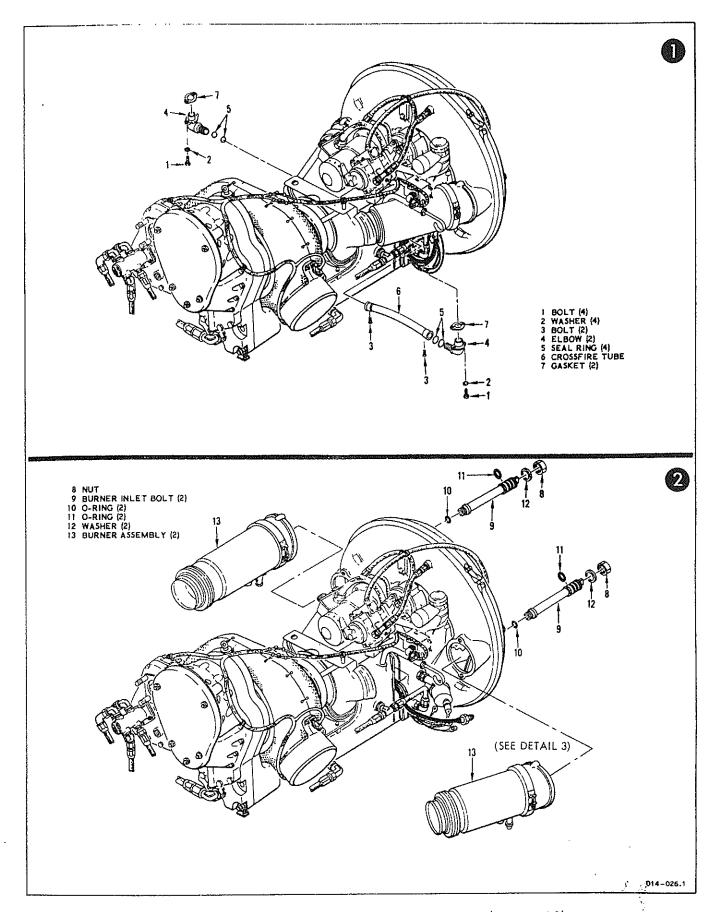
Burner Section Installation, Exploded View (Sheet 1 of 2)
